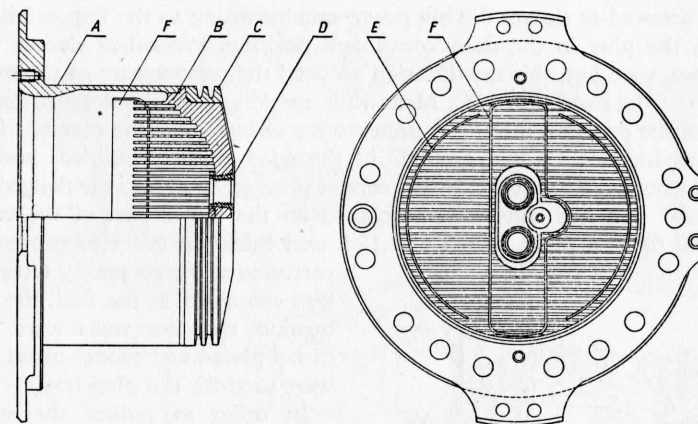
Final design of the cylinder head of the Bristol sleeve valve engine.
